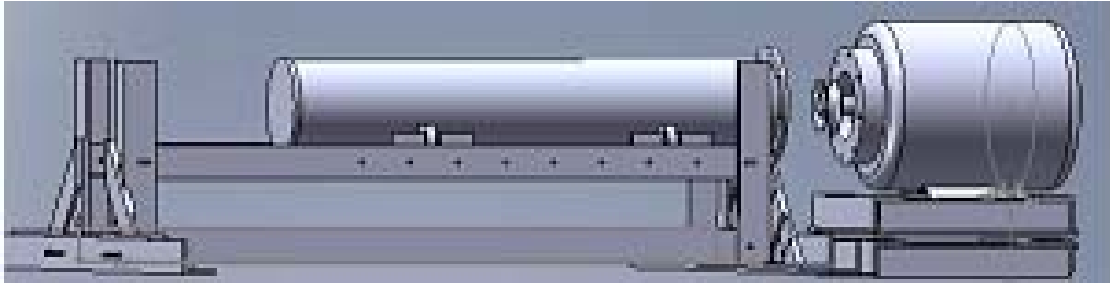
Angled side view, of the sliding assemblies, fixed rails, motor, motor frame, cylinder, and lids.
